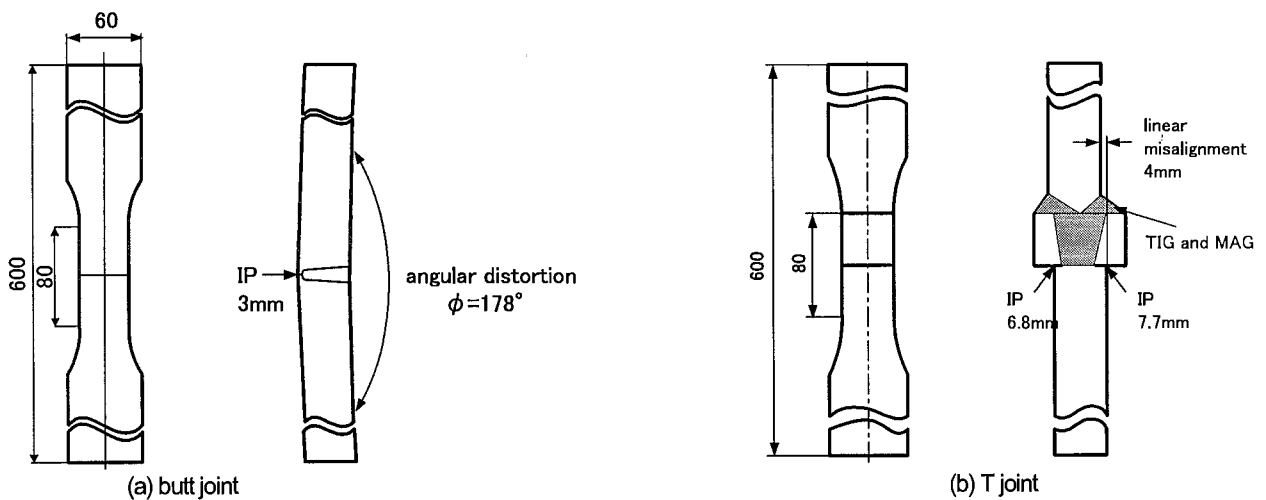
Configuration of fatigue specimens of weldments (mm).
